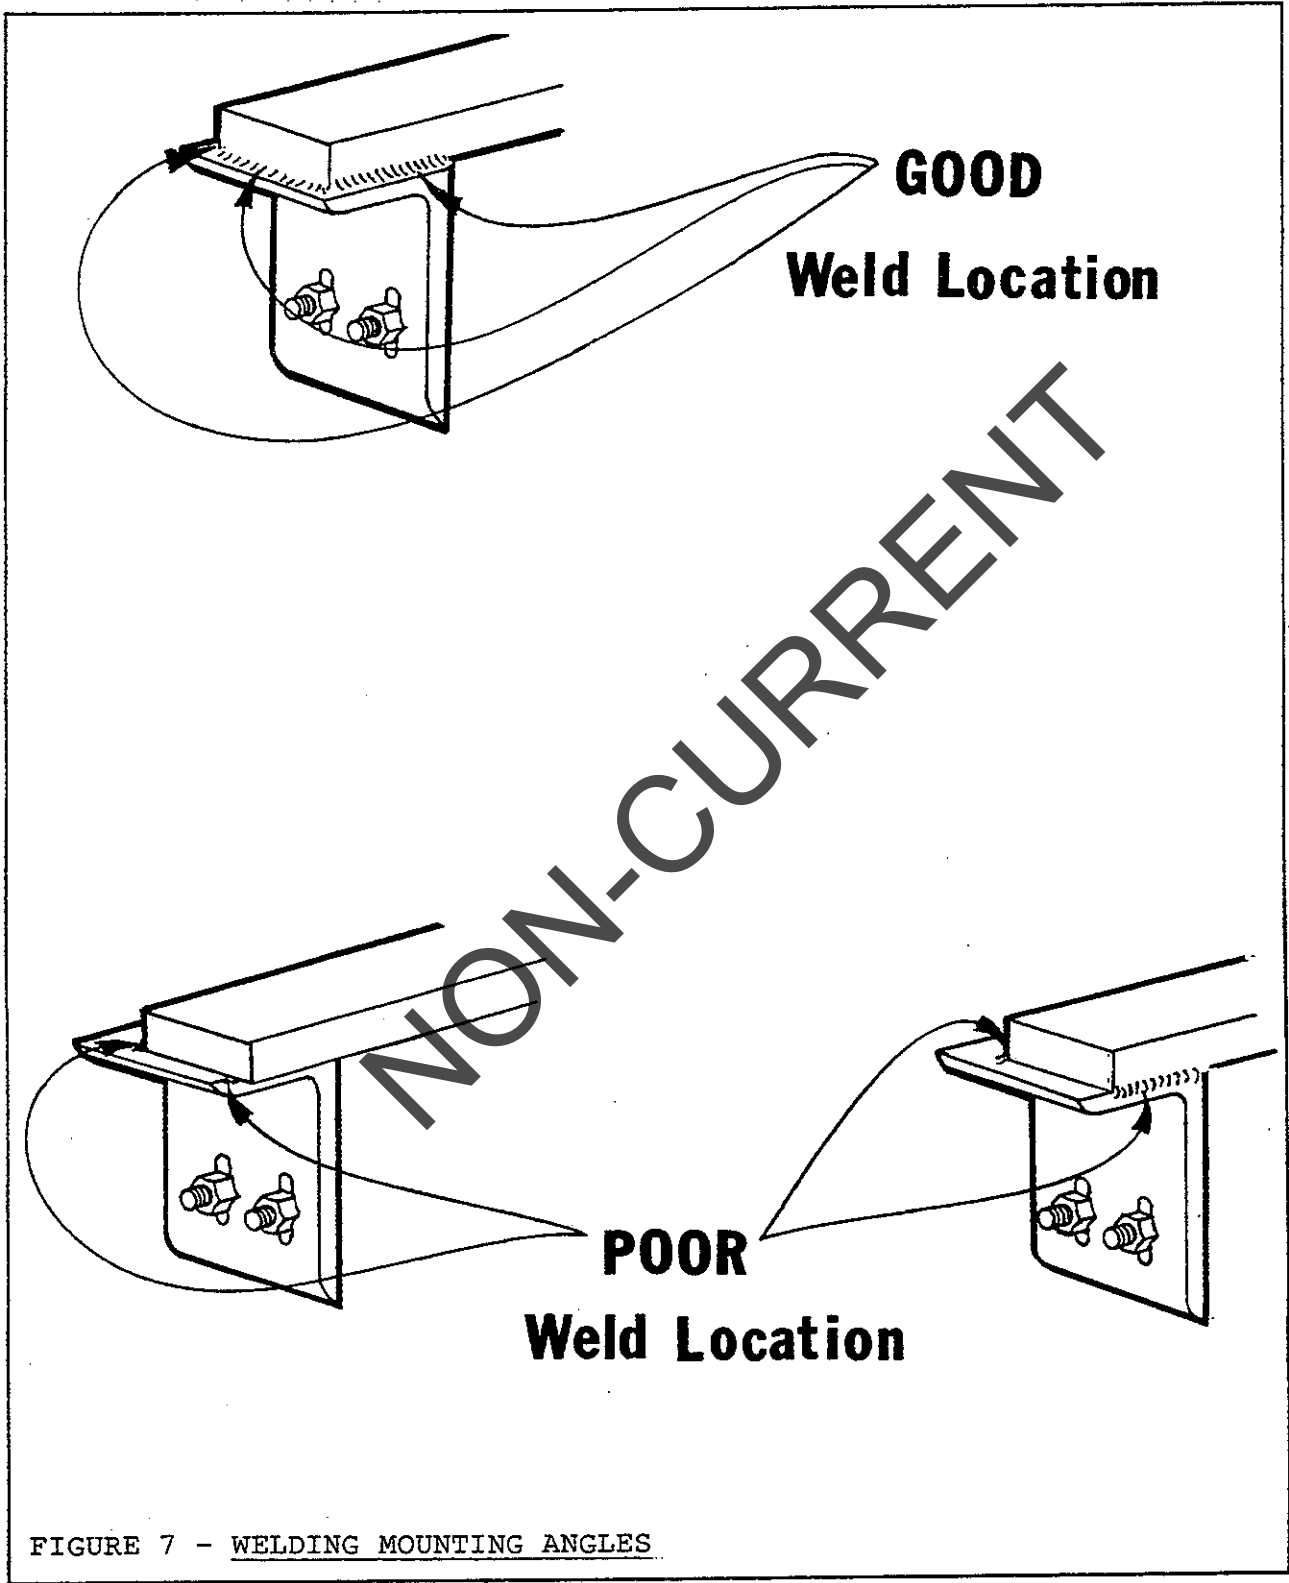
WELDING MOUNTING ANGLES
